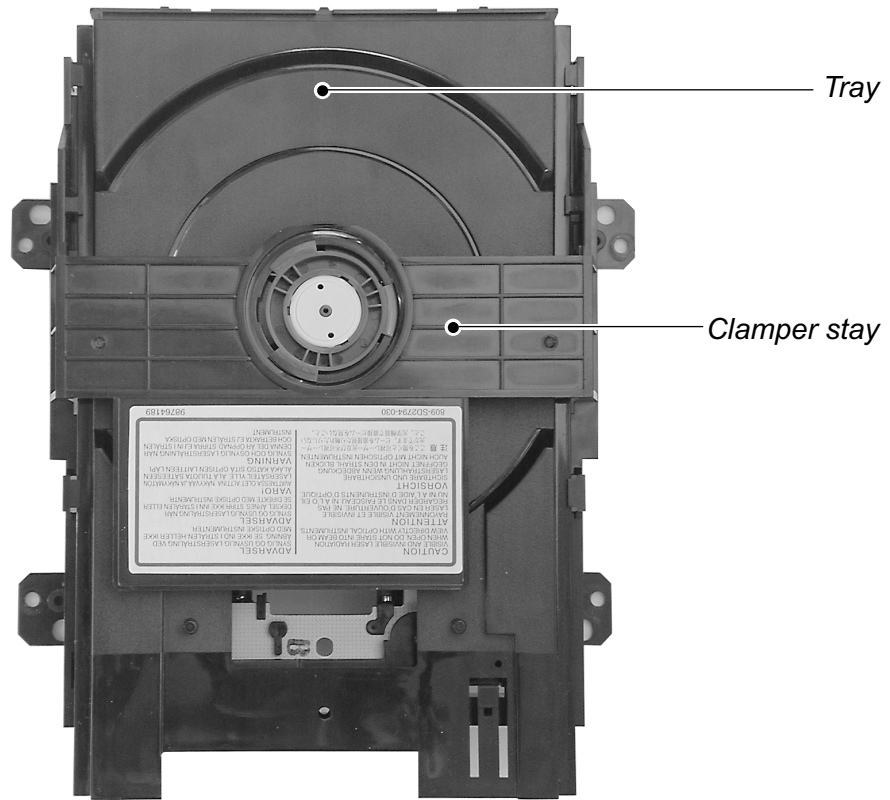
Mechanism chassis assembly (Top side)
